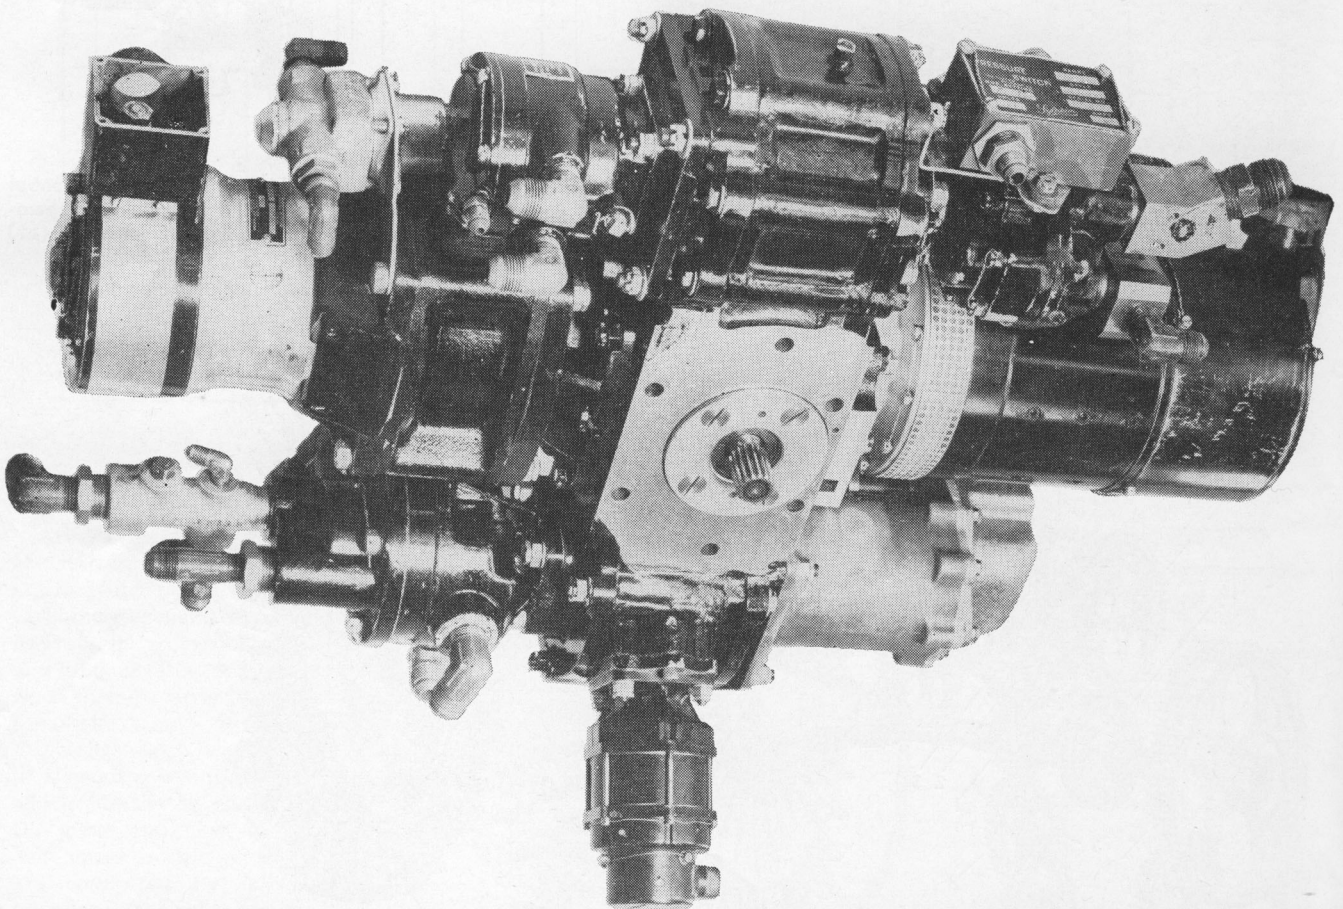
Accessories of the 19-B (seen from below), with connection fitting on a splined drive in the middle of the gearbox mounting face. Accessories on the front face, top to bottom, include: hydraulic or vacuum pump, starter motor and lubricating-scavenger pump; on the side face, tachometer generator; on the rear face, fuel pump, generator, and governor.
